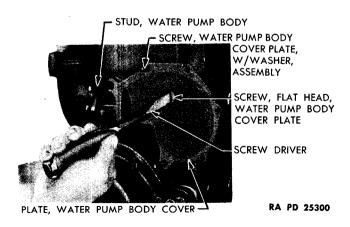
Installing No. 1 Engine Water Pump Body Cover Plate
